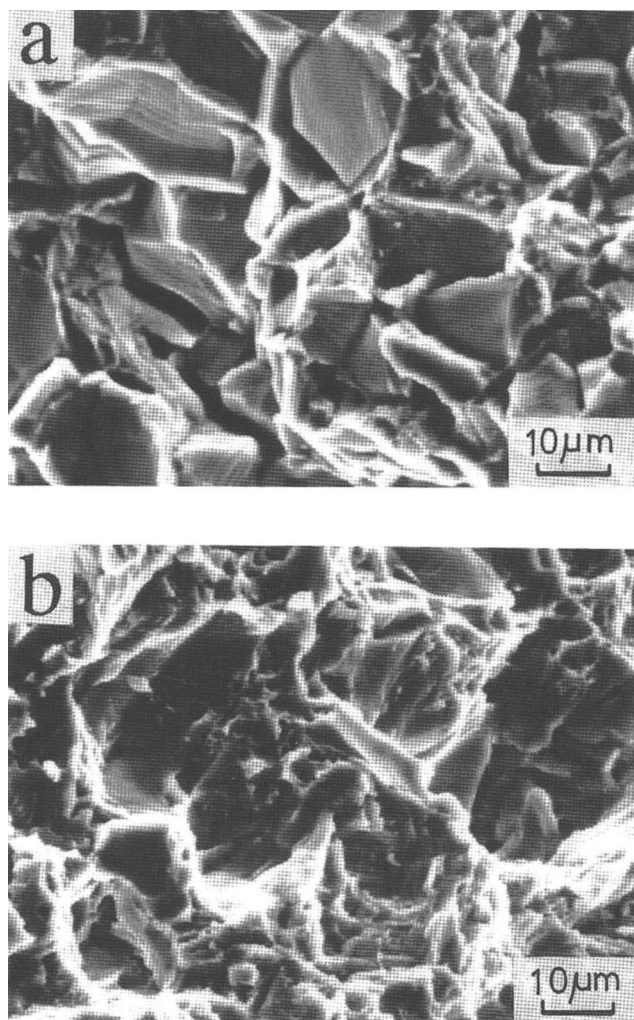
HAZ fractographs of the C1-16 weld in (a) the as-welded condition and (b) after PWHT at 1000 °C/15 min followed by furnace cooling.
